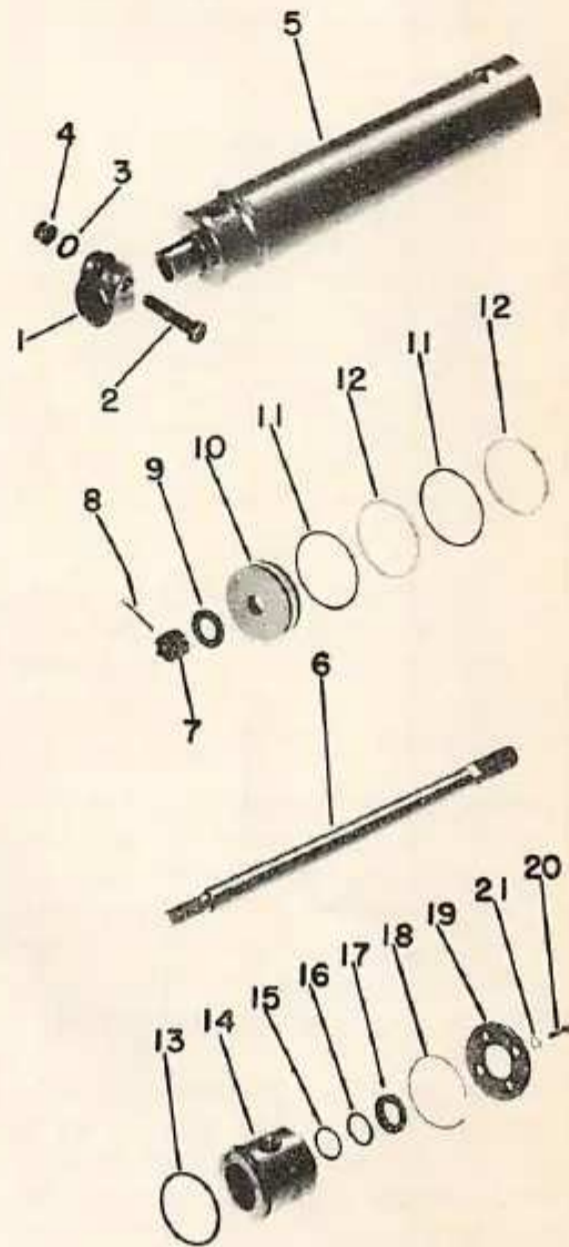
Exploded view of power steering cylinder used on four wheel drive models. Refer to Fig. O49 for schematic view of cylinder line connections.
